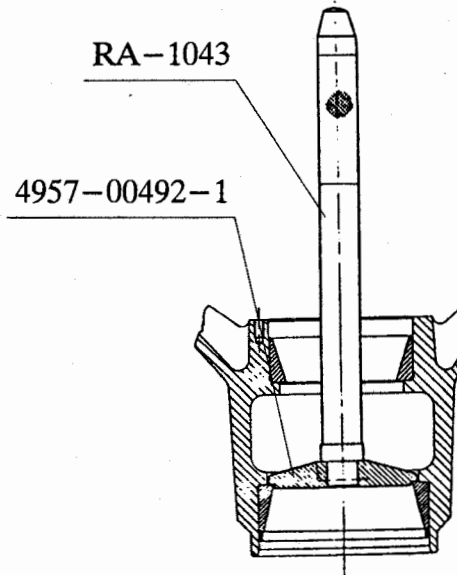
Driving out the sealing ring and the inner race of the inner taper roller bearing
